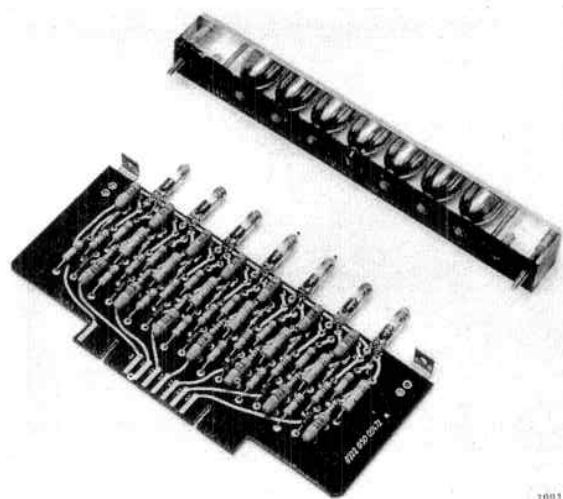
One segment of the display panel disassembled, showing printed circuit board, trigger tubes, and catadioptric tube housing.
